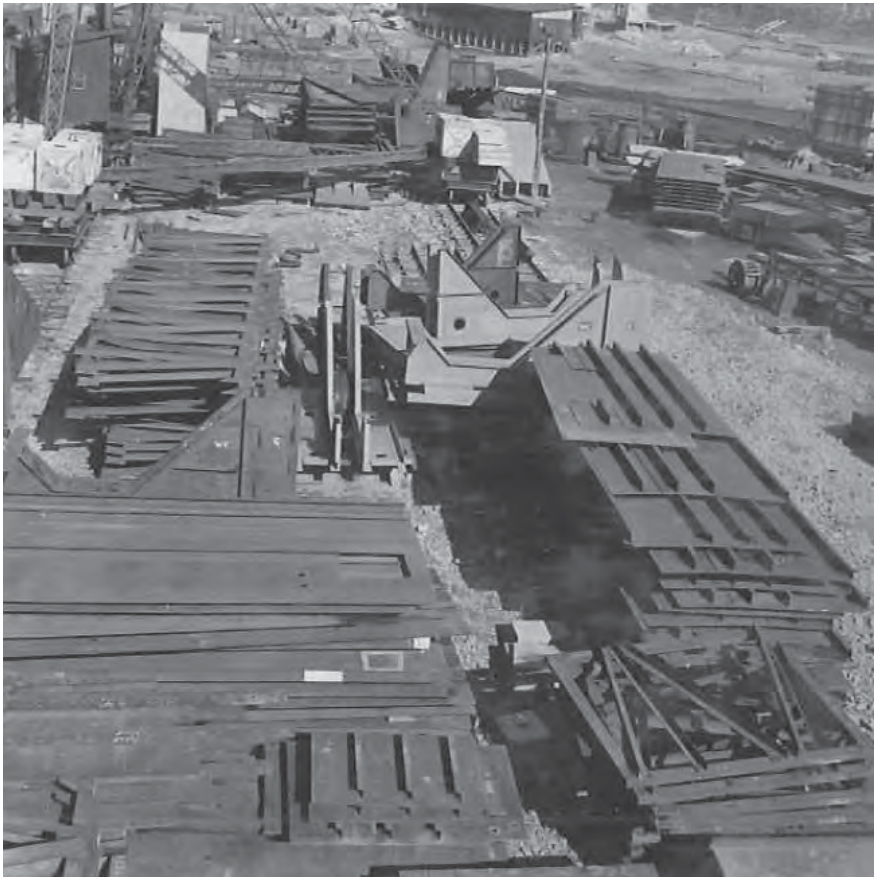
Stockpiles of bulkheads and other steelwork. Note ballast blocks on the mobile crane
